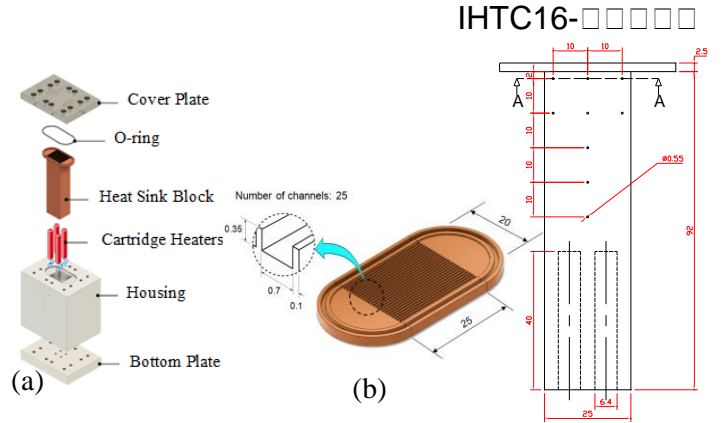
Test section (a) exploded drawing (b) heat sink dimensions, in mm.
